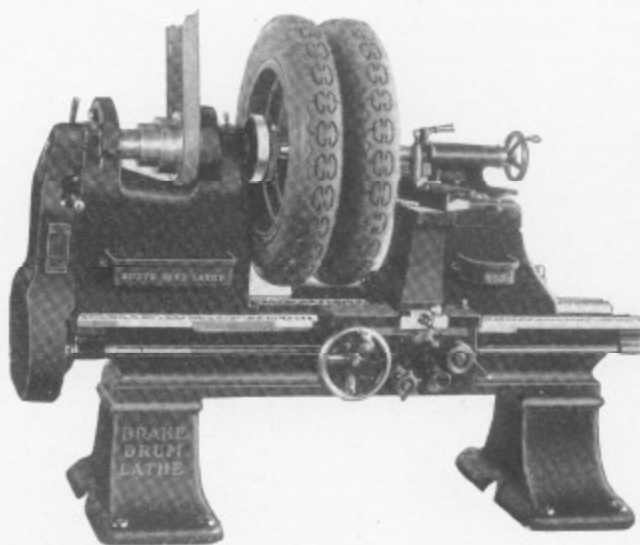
New Model South Bend Brake Drum Lathe with Countershaft Drive
